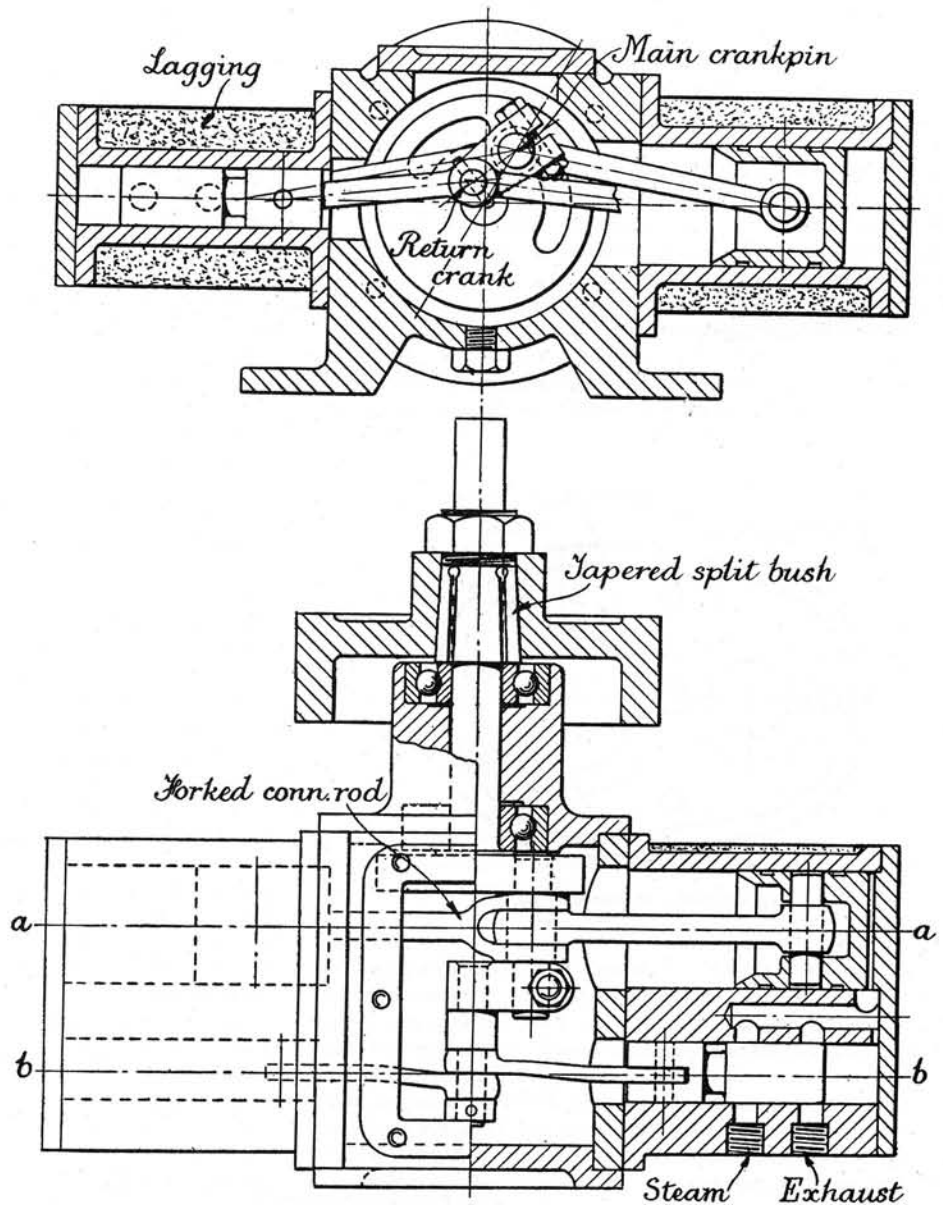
Sectional end elevation and plan of engine. Right hand side of elevation sectioned on line aa and left hand side on line bb. In plan view, piston is shown at end of stroke, and piston-valve in mid-position to simplify drawing. Scale: full size.
